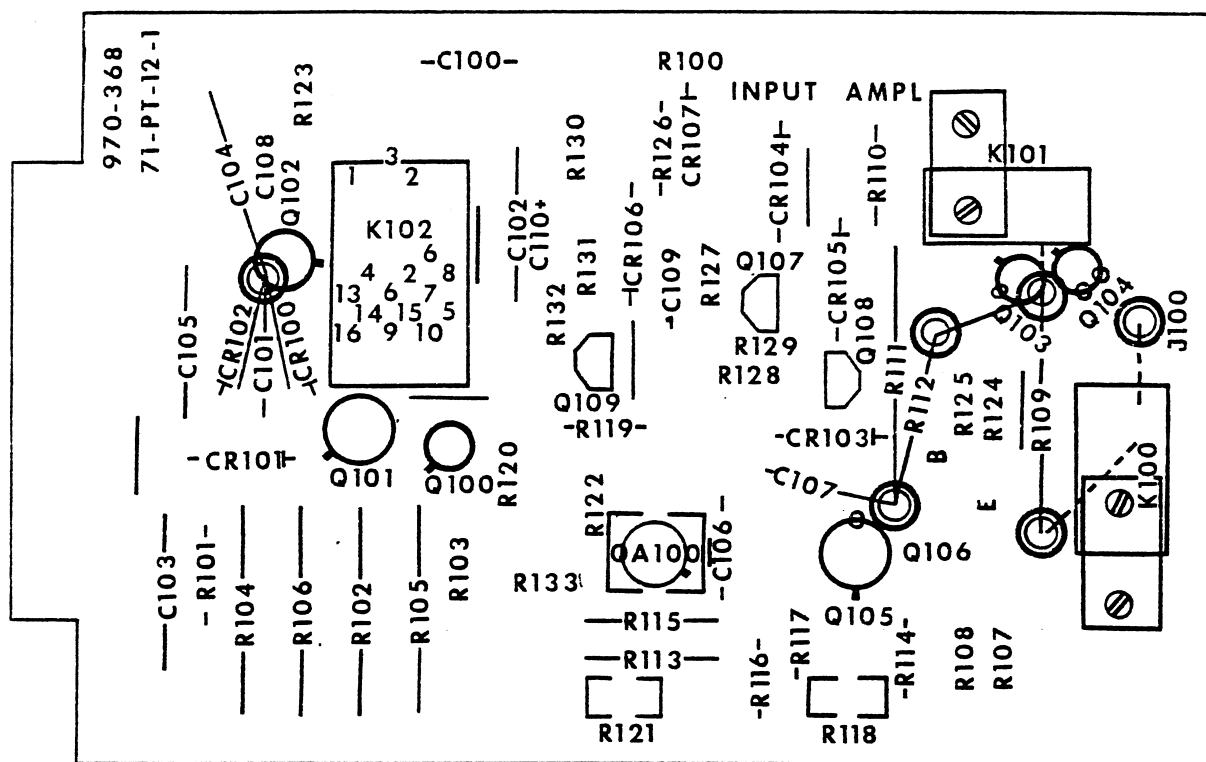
J5 Input Amp. Printed-circuit Board, code 900-375.
